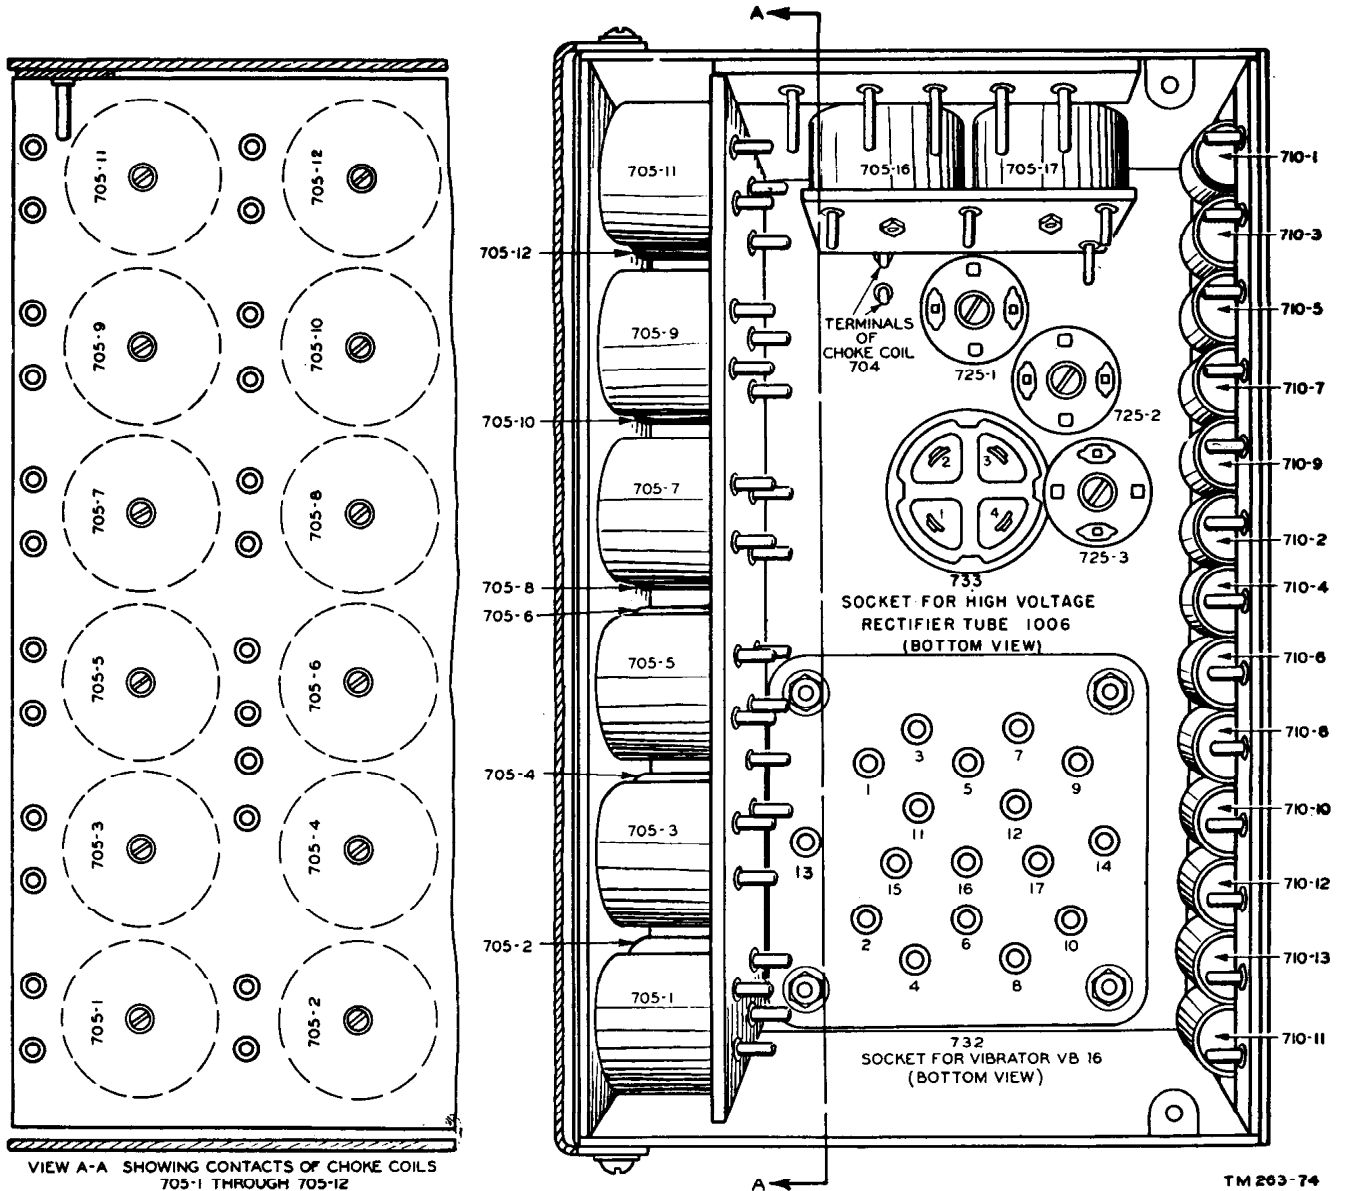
Shielded compartment for hv vibrator socket and filter unit, viewed from bottom of chassis.
